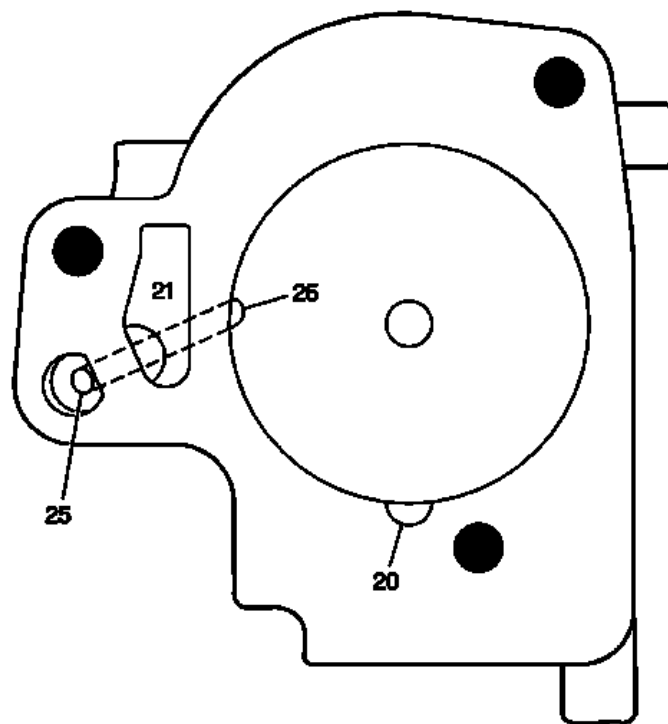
View Of Overrun Clutch Housing Oil Seal Rings
